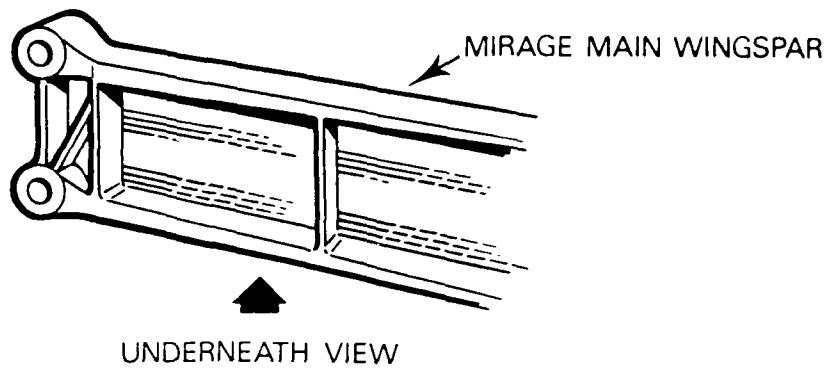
LOCATION OF FASTENER HOLES IN THE MIRAGE WING-SPAR (LOWER FLANGE) AND THE ATTACHED REARWARD WING-SKIN.
